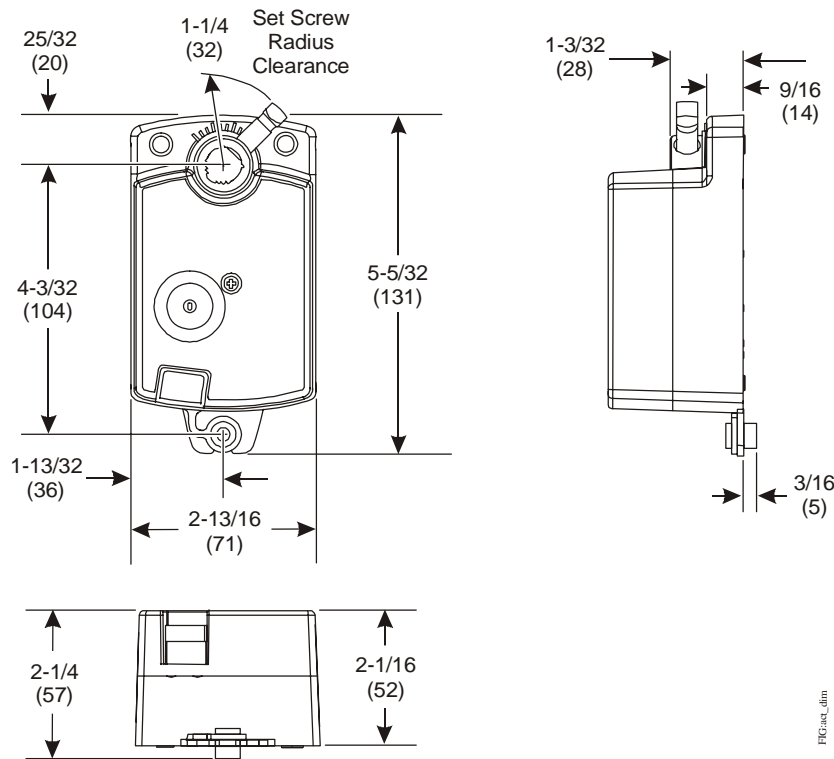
M9102/M9104 Series Electric Non-Spring Return Actuator Dimensions, in. (mm)
